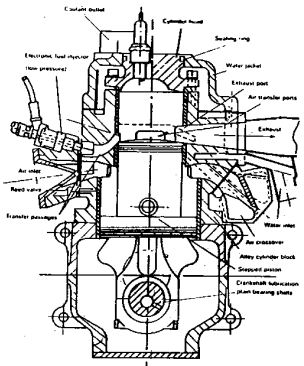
A prototype stepped piston two-stroke engine with wet-sump lubrication, and fuel injection into the transfer passage.
